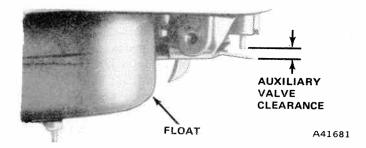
Auxiliary Inlet Valve Adjustment
